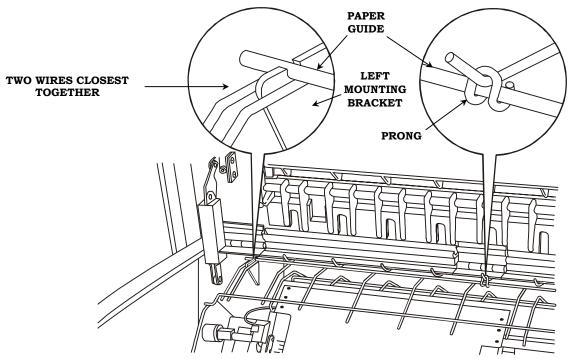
REINSTALLING THE PAPER GUIDE (LEFT VIEW) 5050/5100 (55 or 60 dBa) CABINET MODEL
